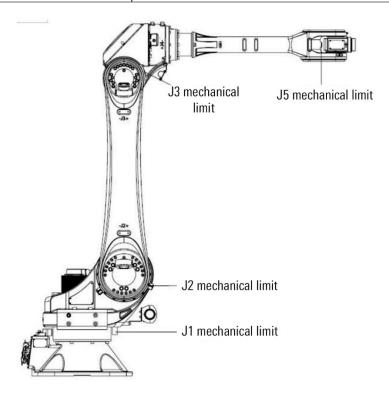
AIR35-2700/AIR20-3100 mechanical brake
